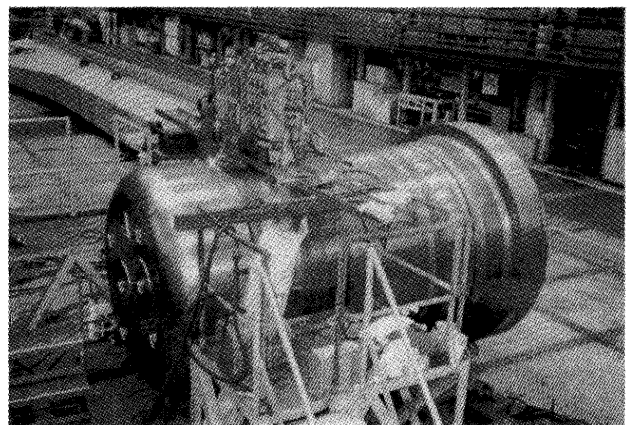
Narrow gap welding for piston cylinder (276mm t.).
